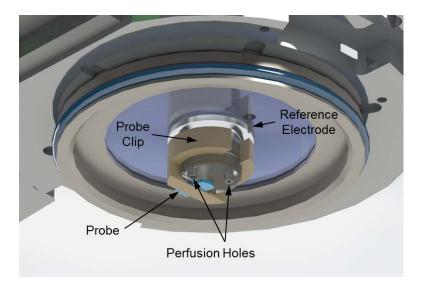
Bottom view rendering of the fully assembled Perfusion Probe Holder (901.939)
